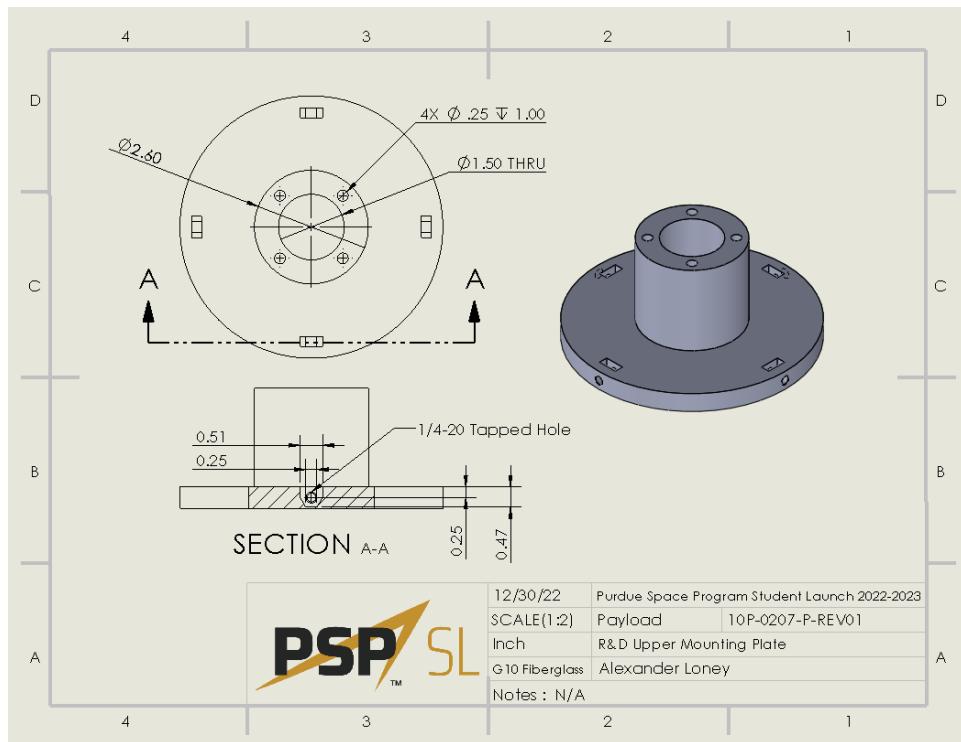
R&D Upper Mounting Plate Technical Drawing
